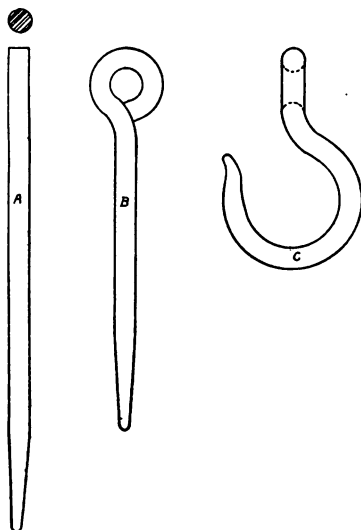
Bent hook. A—Iron drawn out and pointed. B—After completing the eye. C—Completed hook.
